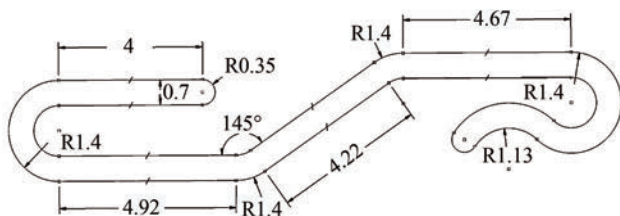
Initial profile design of the carcass layer with its dimensions (units: mm)
